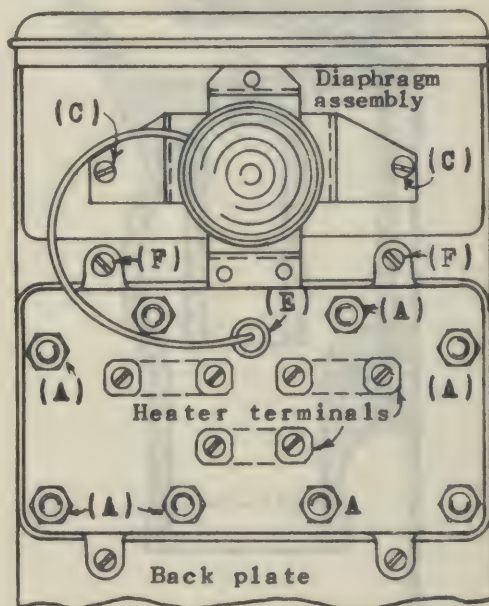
(below) Heater Assembly with cutout switch removed.
